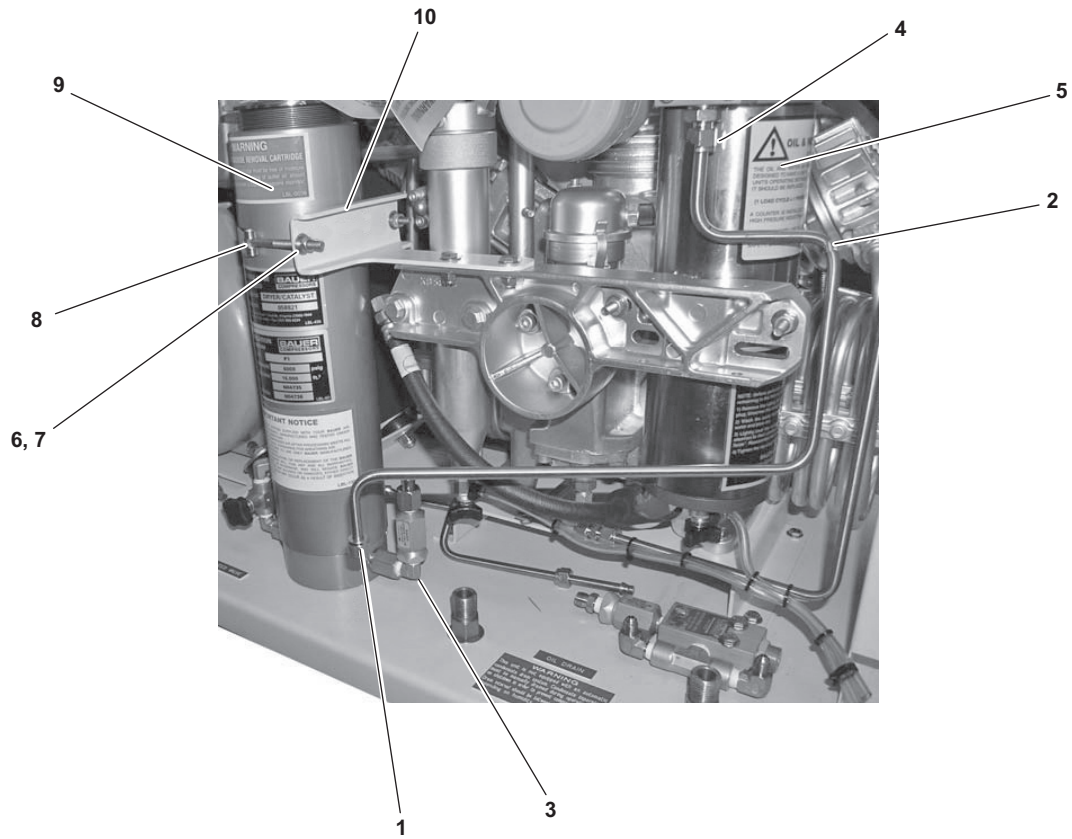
Removing Flare Fitting on Line to Pressure Maintaining Valve
